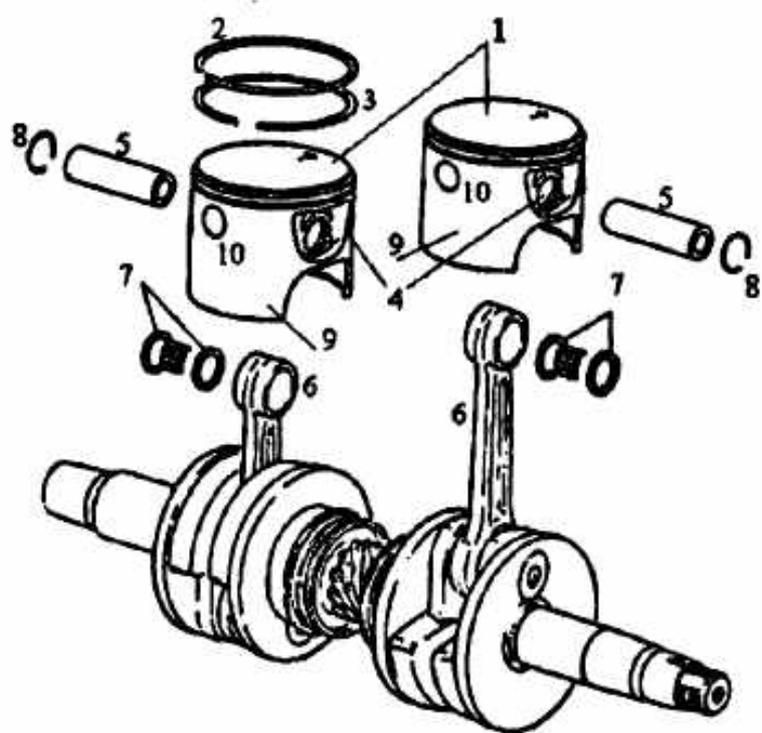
Piston-cylinder-unit of ROTAX-582 RE
